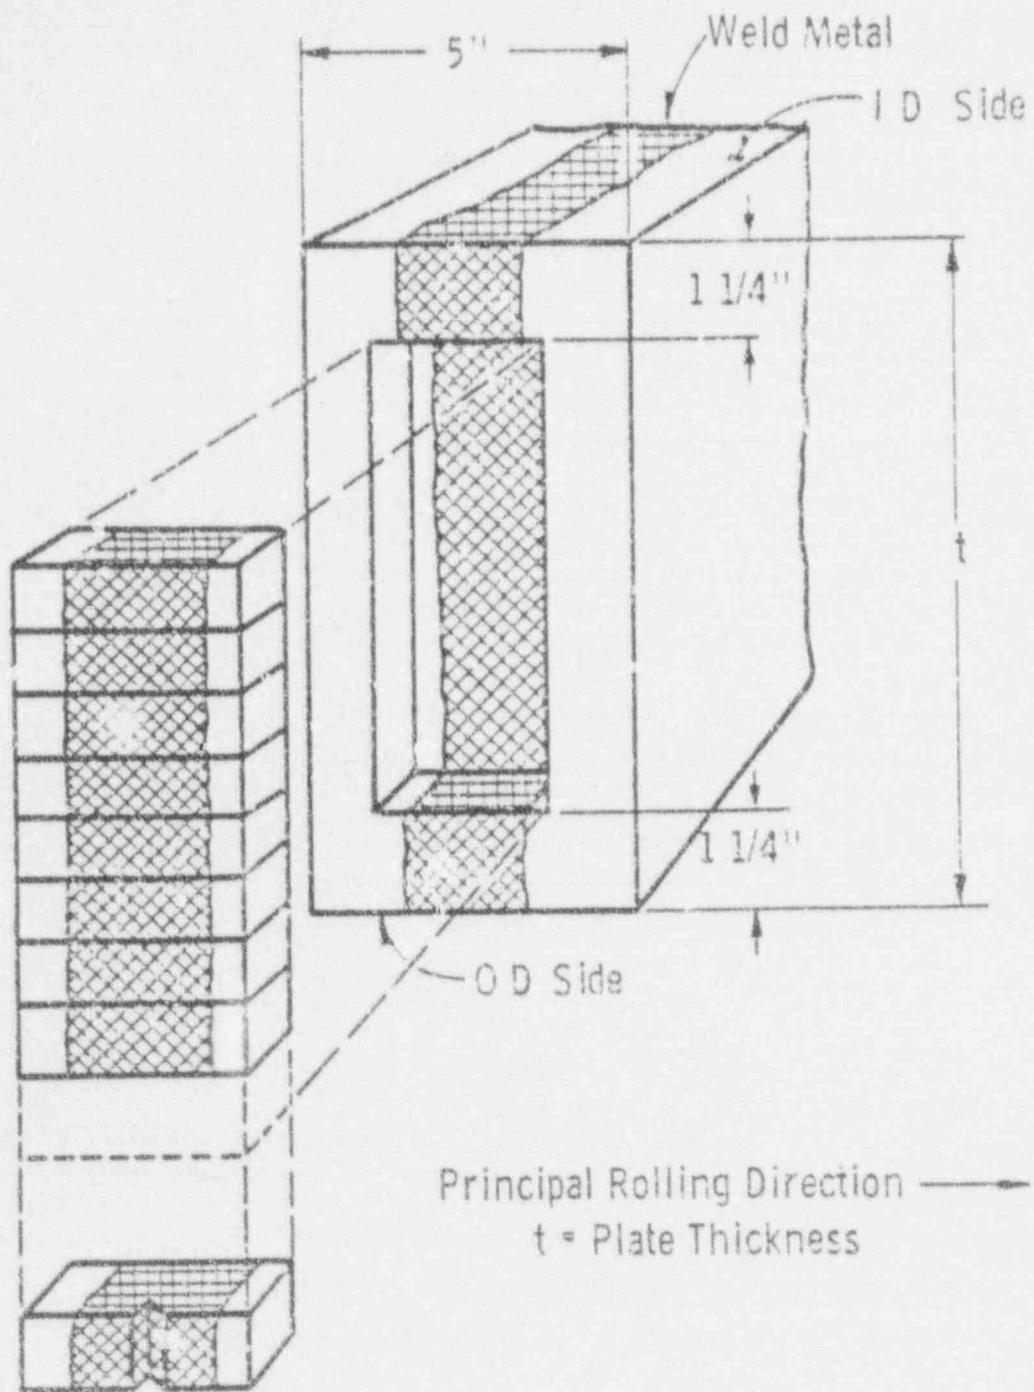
Location of Charpy Impact Specimens Within Weld Metal Test Material
